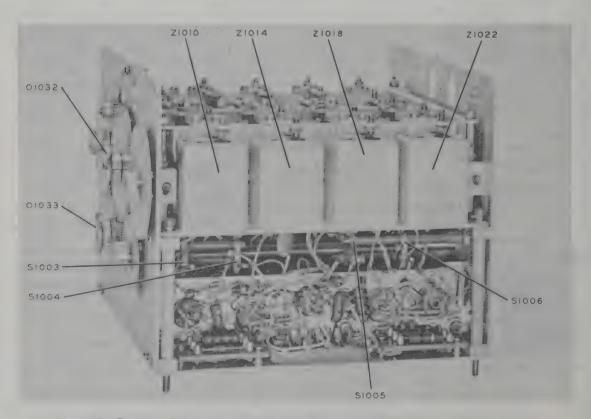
Tuner Subassembly, Right Side View, Switch and Coupler Location
